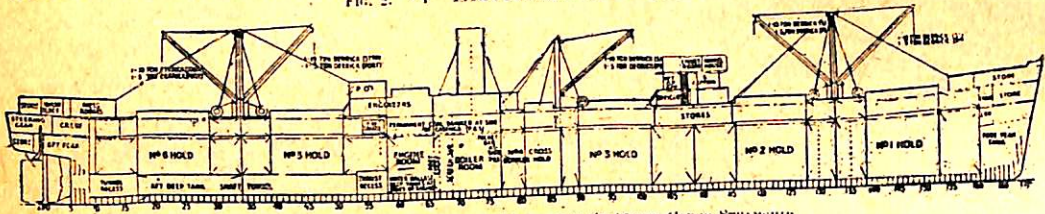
"B" TYPE PARTIALLY FABRICATED STANDARD CARGO STEAMSHIP
